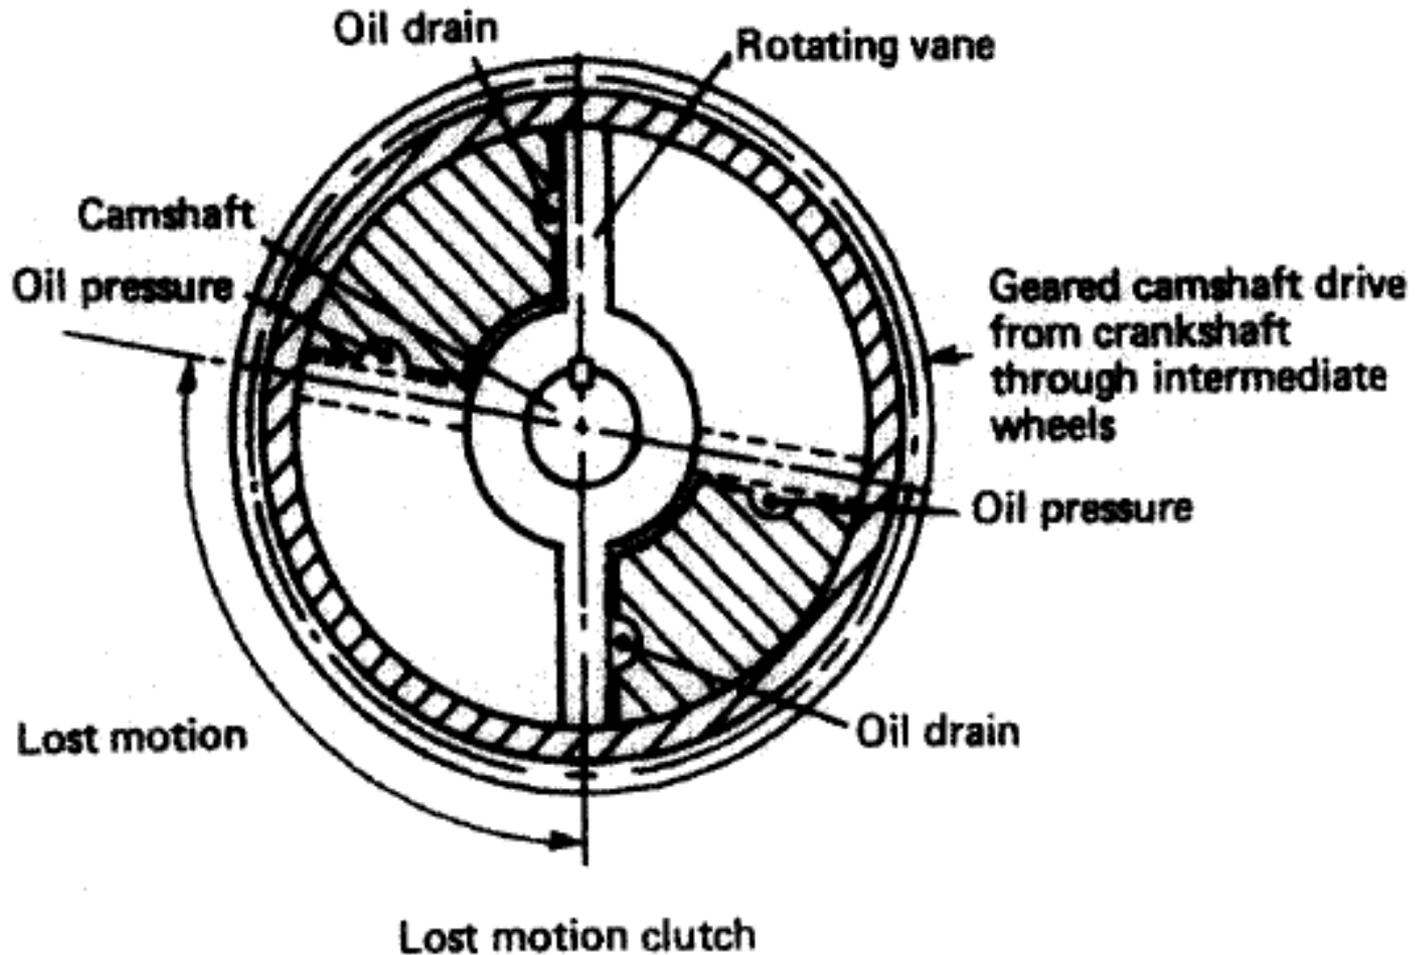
Method of altering the relative positions of the crankshaft and camshaft before reversing a diesel engine.
